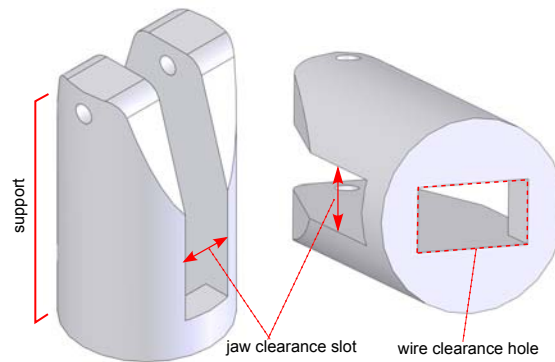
Single-piece concept for tool mount with two supports and a wire clearance hole.
